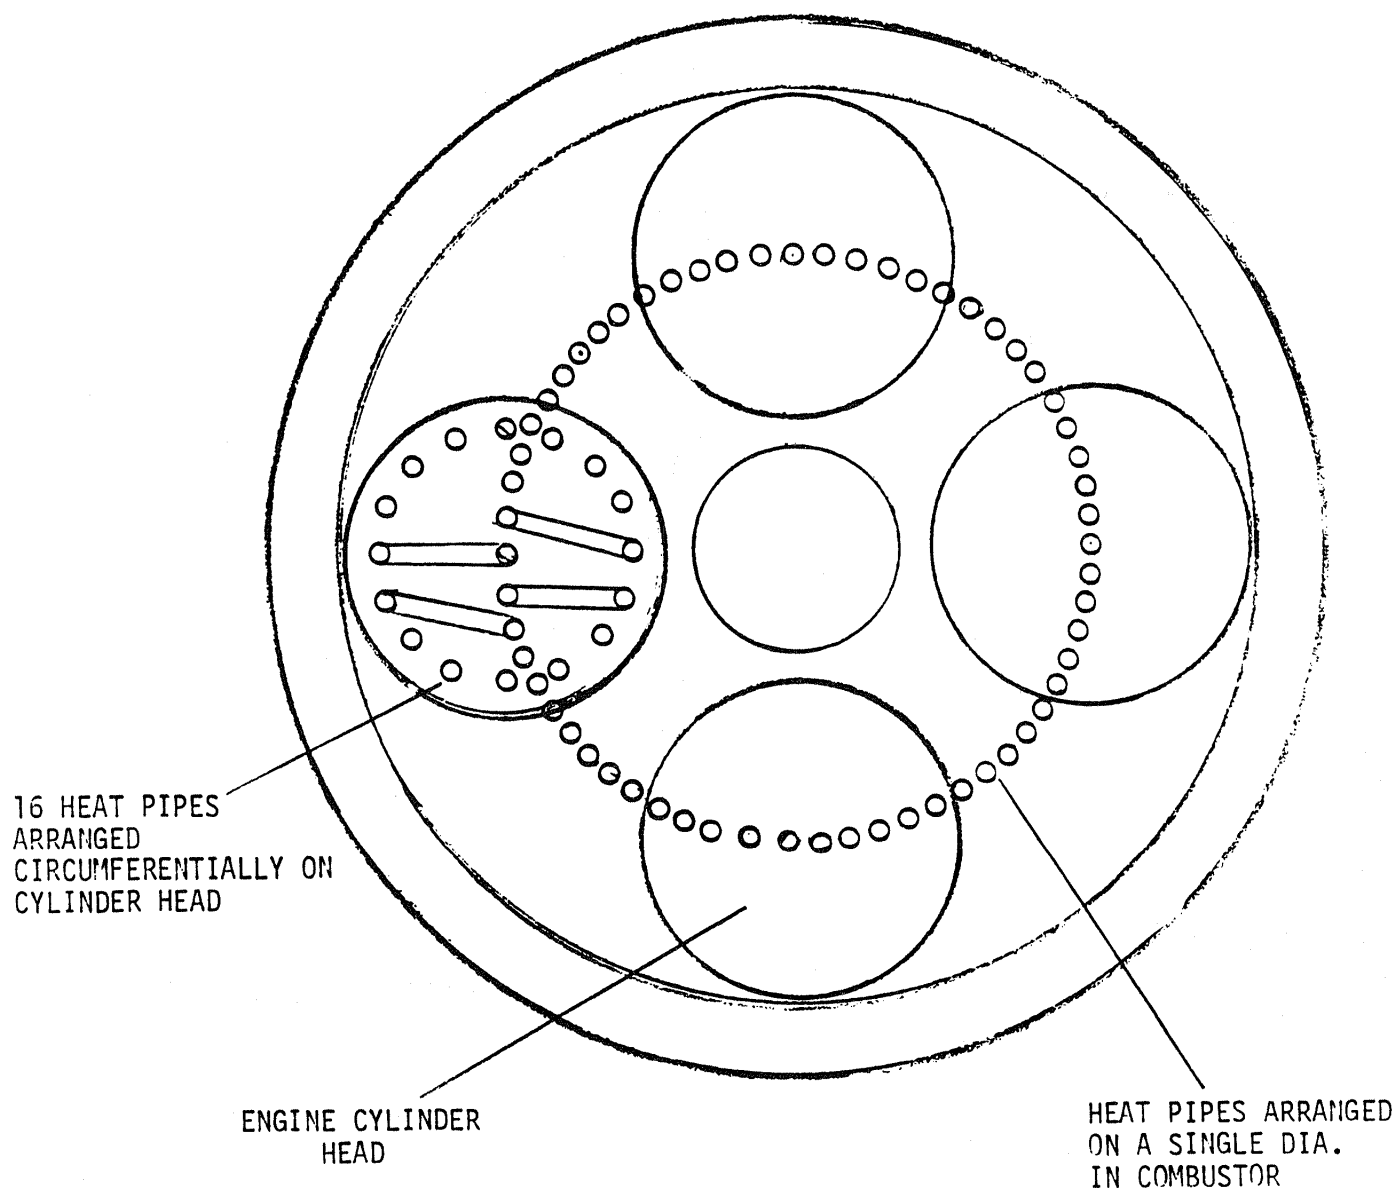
CROSS-SECTIONAL VIEW OF HEAT PIPE ARRANGEMENT
